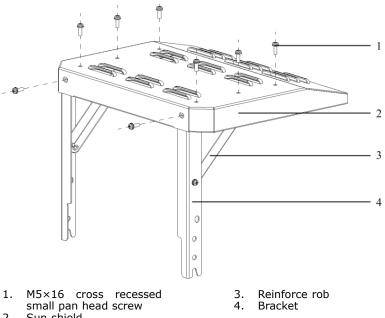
MOUNTING ZXMBW E9230 CABINET
